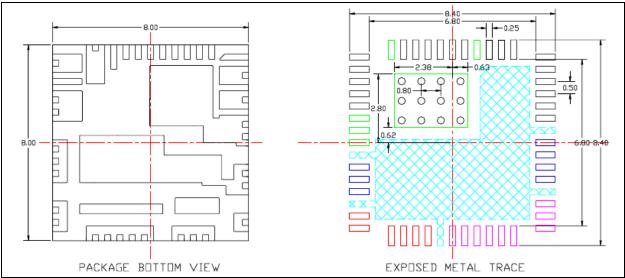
Package Bottom View vs. PCB Recommended Exposed Metal Trace.
